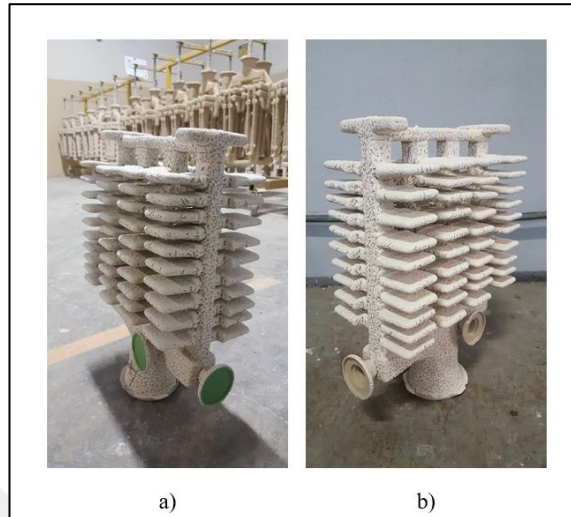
13 Appearance of a mold a) before wax removal b) after wax removal.
